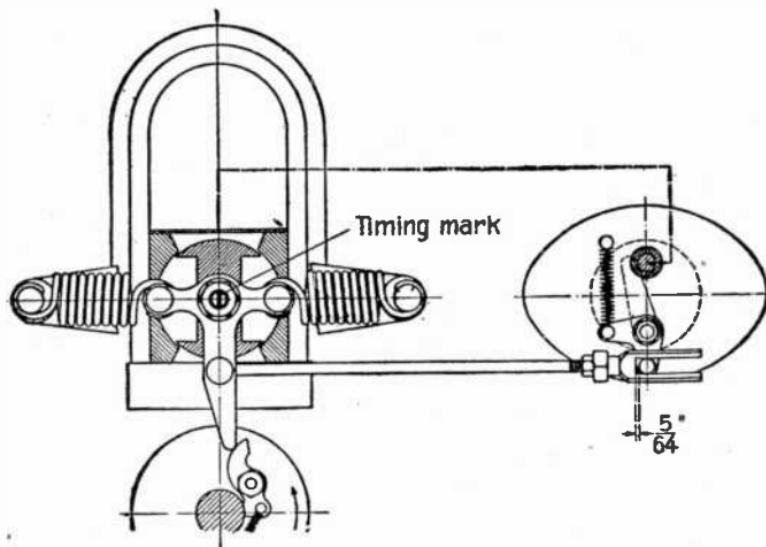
,042.—Timing diagram for oscillating type low tension magneto 1. Igniter shaft in contact with stationary pin.
